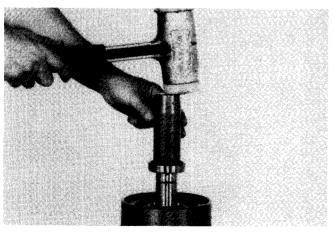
Install clutch gear inner bearing. NOTE: This bearing does not have a shield in it.
